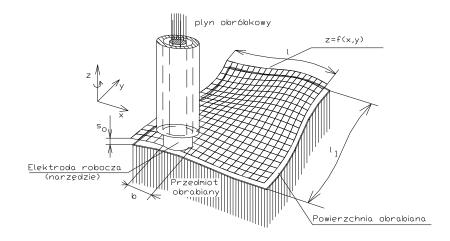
Scheme of machining with universal electrode – tool (1), 2 workpiece, 3 – nozzle for electrolyte supplying, a – thickness of material removed during one electrode pass
